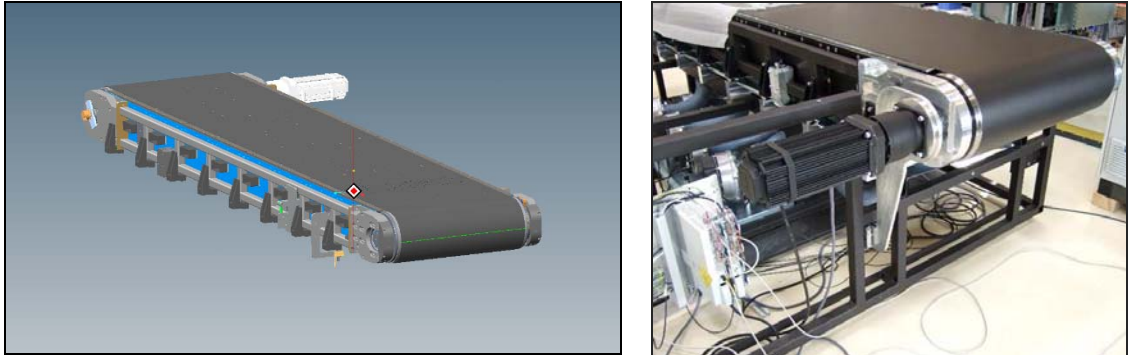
CAD drawing (left) and photographic image of the conveyor belt system
